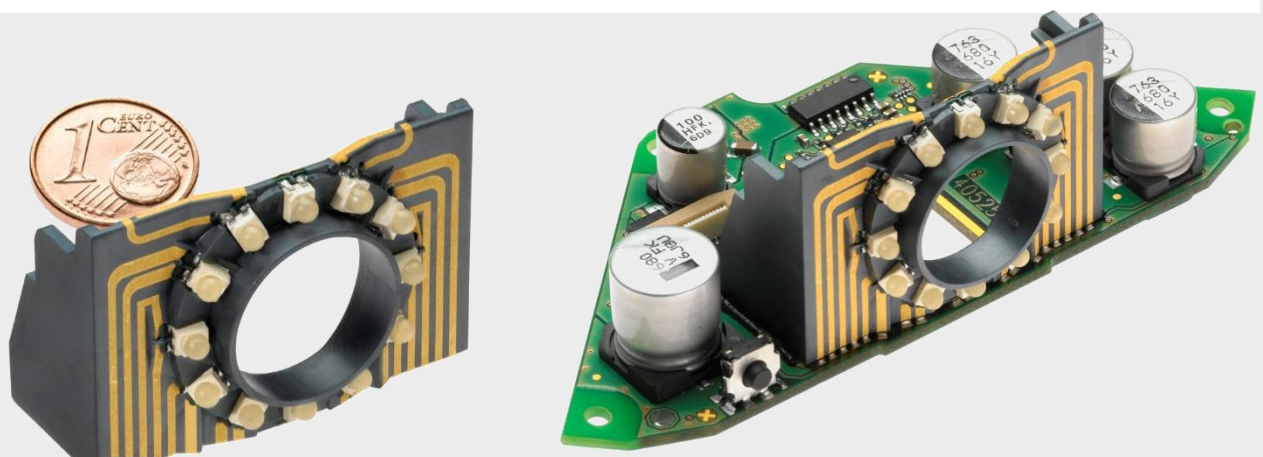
MID lighting module for a safe camera system (left) and mounted on a PCB (right)
